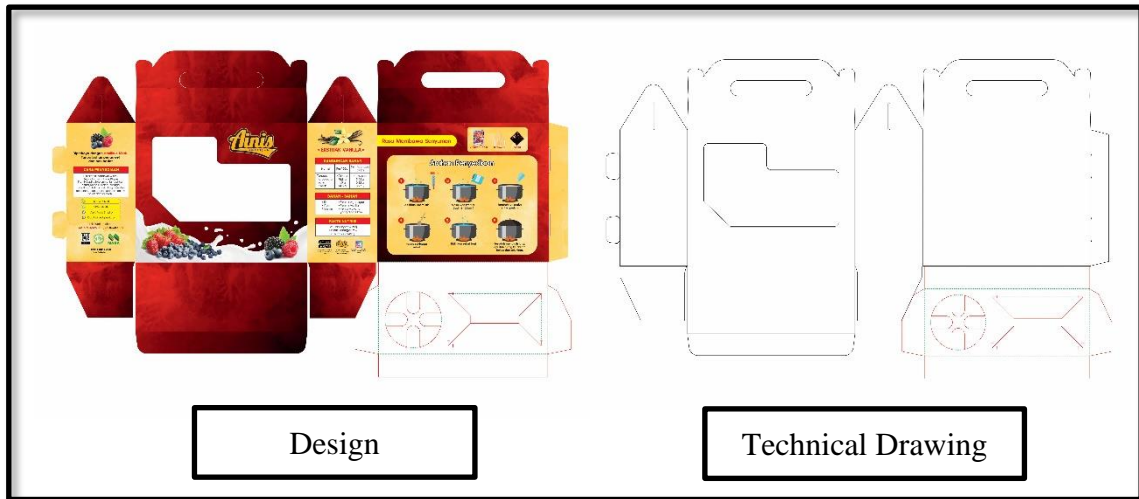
Innovation of Box Handle Packaging Technical Drawing
